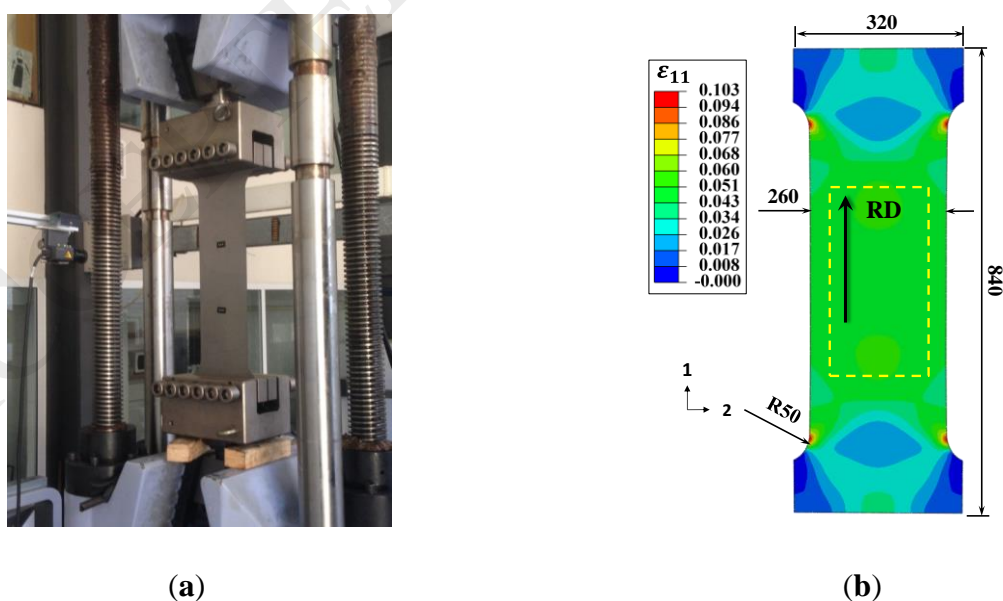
Pre-strain experiment: (a) the tensile testing machine equipped with a large grip system (b) the size of the large specimen and strain distribution (ϵ_{11}).
